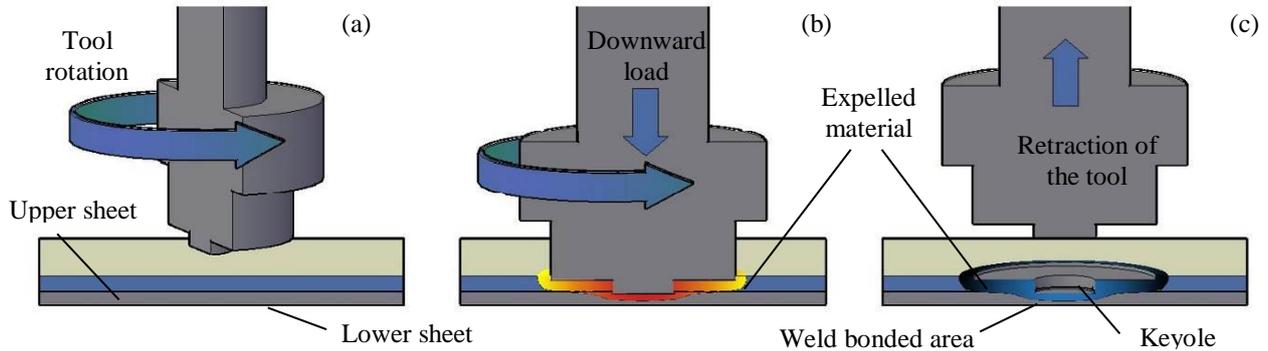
Illustration of the FSSW process: (a) plunging, (b) stirring, (c) retracting
